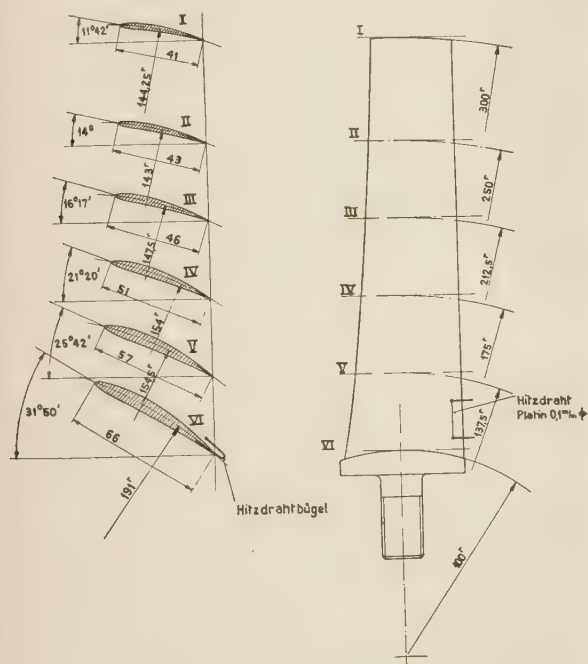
AN IMPELLER BLADE WITH THE HOT-WIRE ARRANGEMENT (Hitzdrahtbügel = Flexible Copper Wires; Hitzdraht Platin 0.1 m/m φ = Hot Wire Platinum 0.1 mm φ.)
